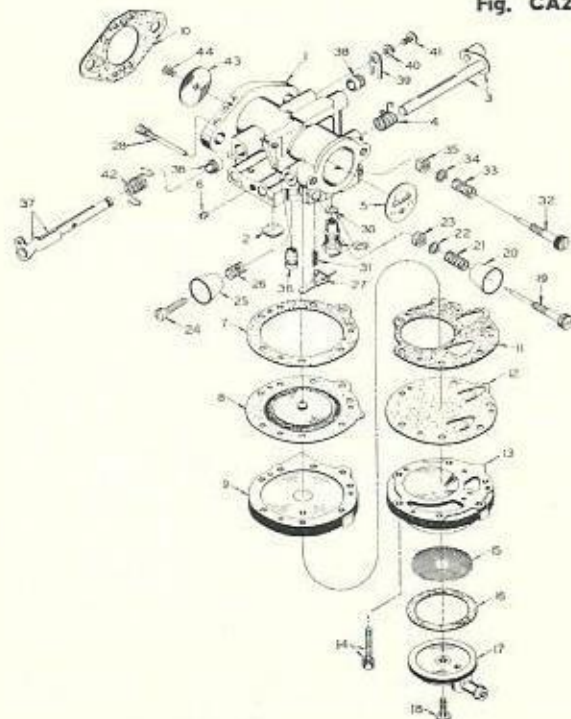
Exploded view of typical Tillotson carburetor used on Canadian chain saws. Screw cups (20 and 25) are not used on all models.
